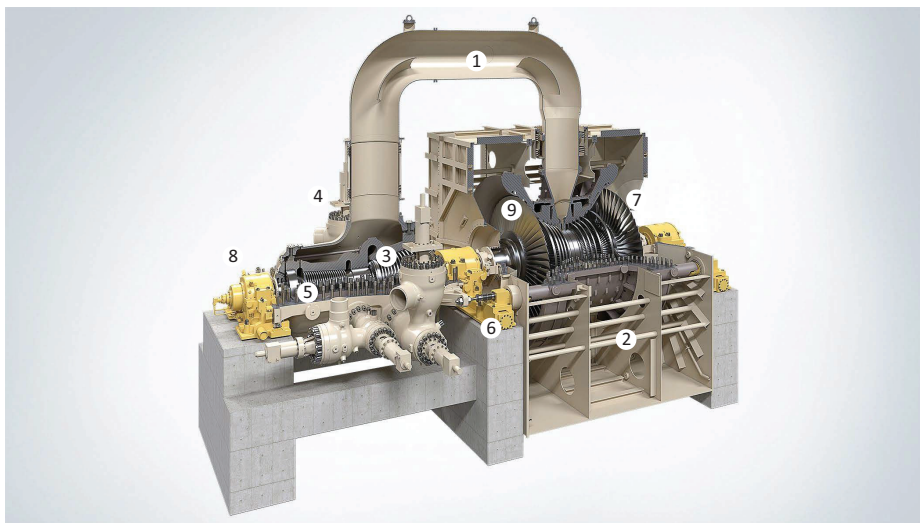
Combined cycle steam turbine. (Courtesy: Siemens.)
